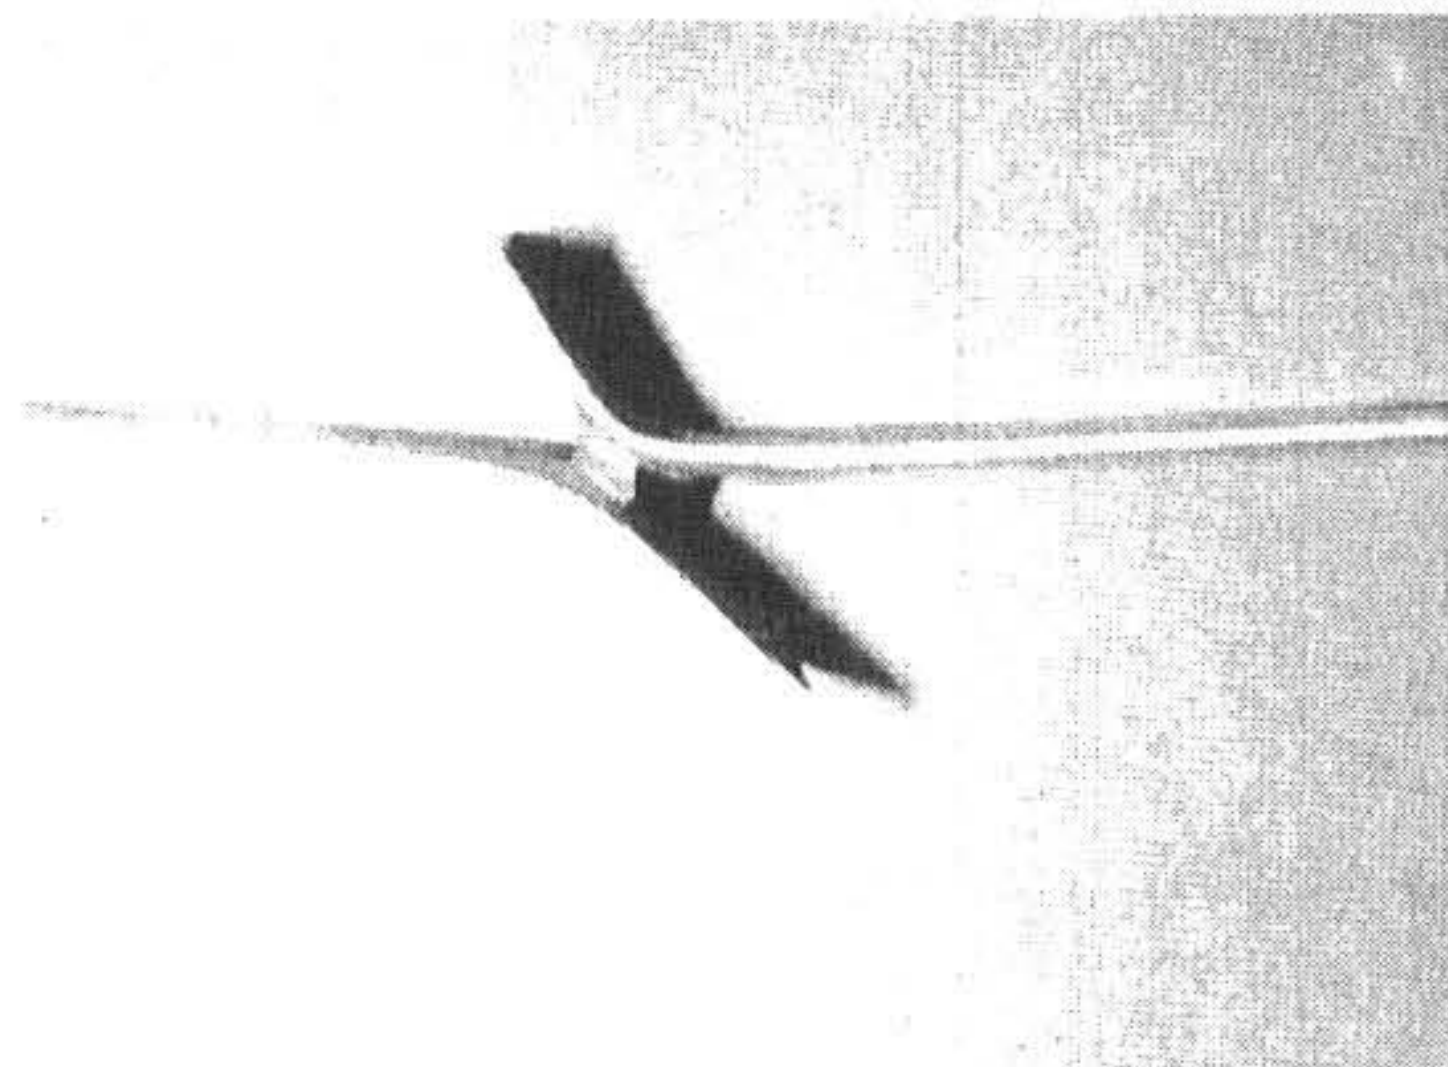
Fracture of specimen AxB with the tensile load of 1,450kg
